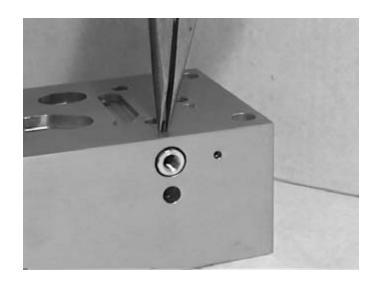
Removing Roll Pin Retaining Shuttle Seat
